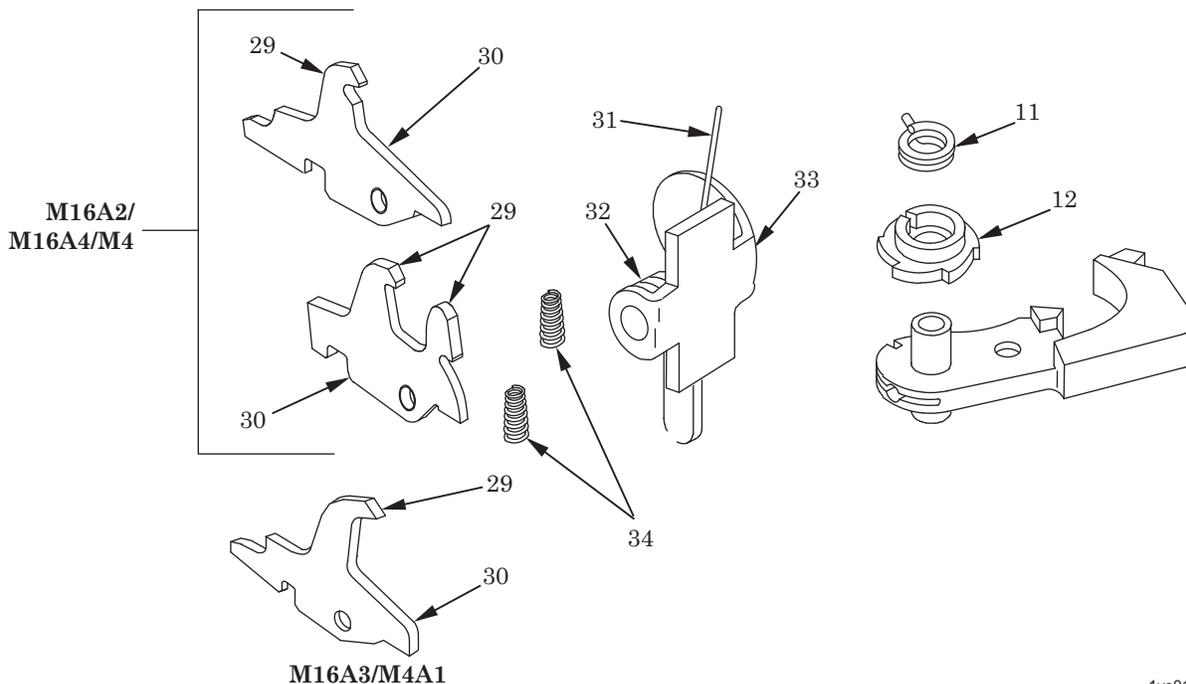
Disconnector, Automatic Sear, and Burst Cam Inspection.
